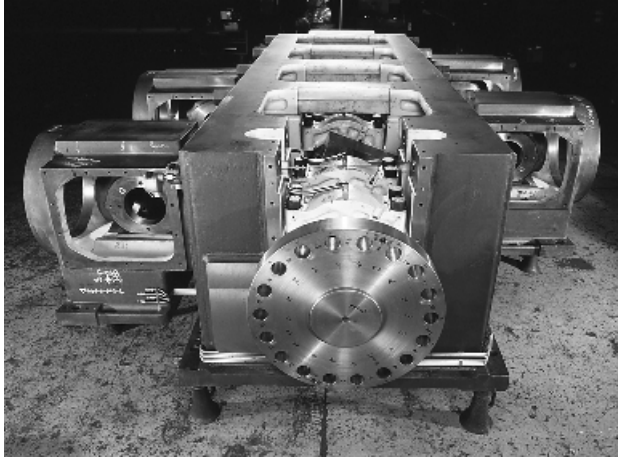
Cast iron compressor frame assembly showing double bearings at the drive end. (*Dresser-Rand Company, Painted Post, N.Y.*)
